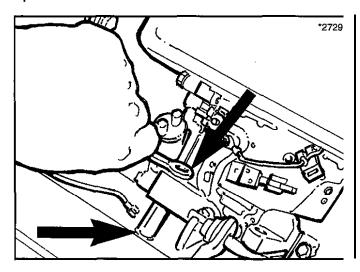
Remove Hex Nut And Screw Securing Safety Interlock Wire #2 To Engine Block Base
